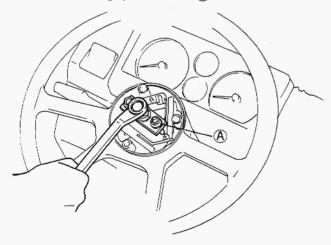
(A) Special tool (Steering wheel remover 09944-36010)
